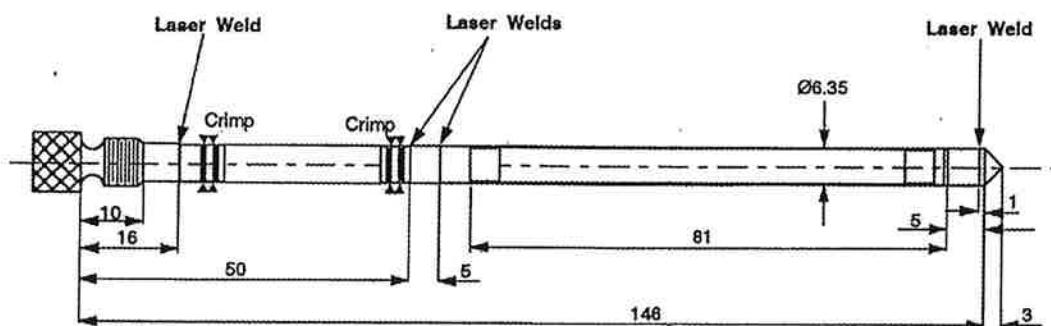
QUELD II Sample Configuration (the dimensions are in mm)
